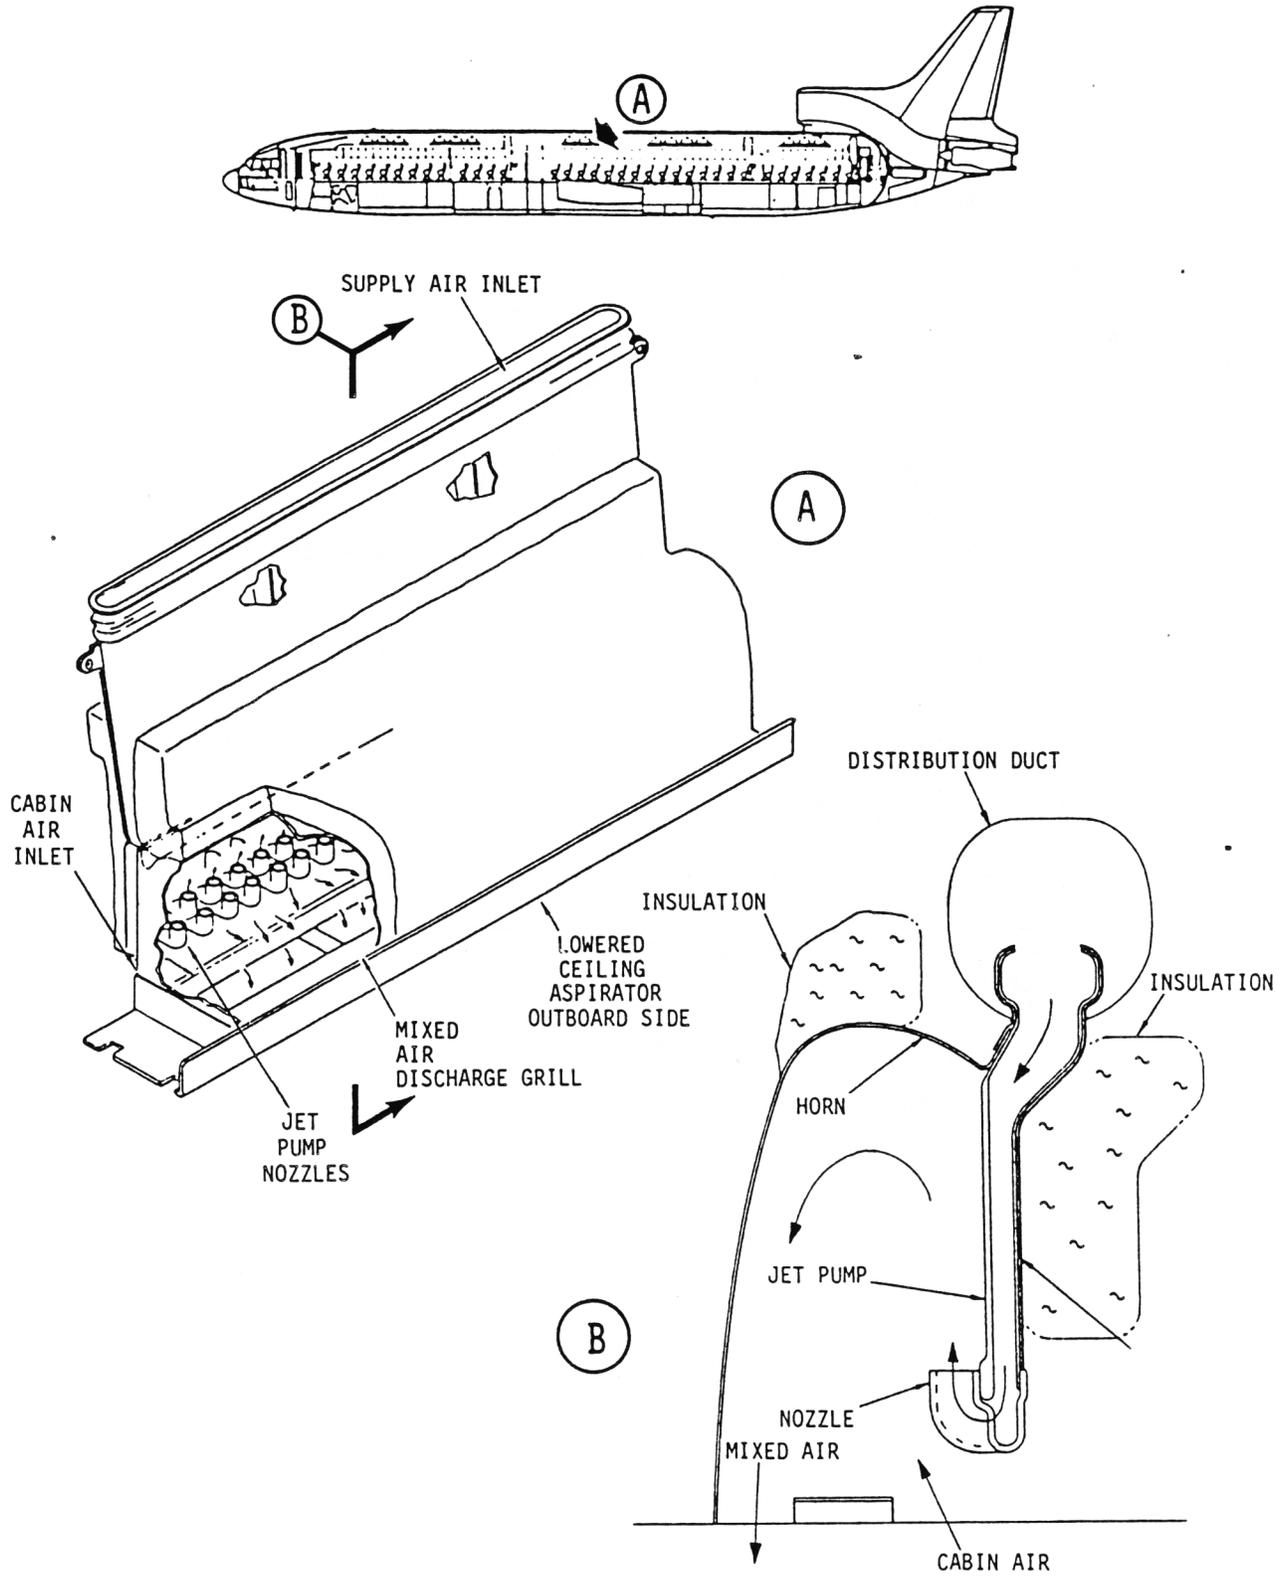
LOCKHEED L-1011 PASSENGER CABIN ASPIRATOR
